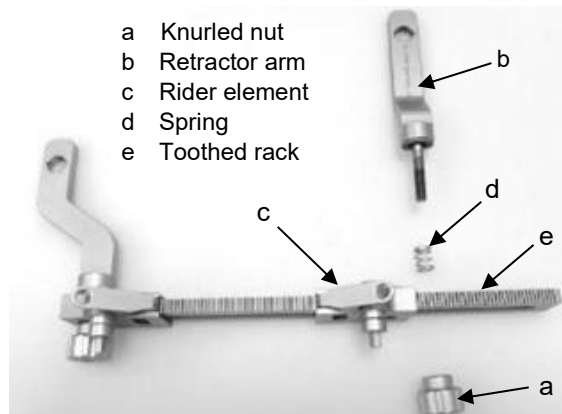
MICS IMA intercostal retractor with one retractor arm removed
